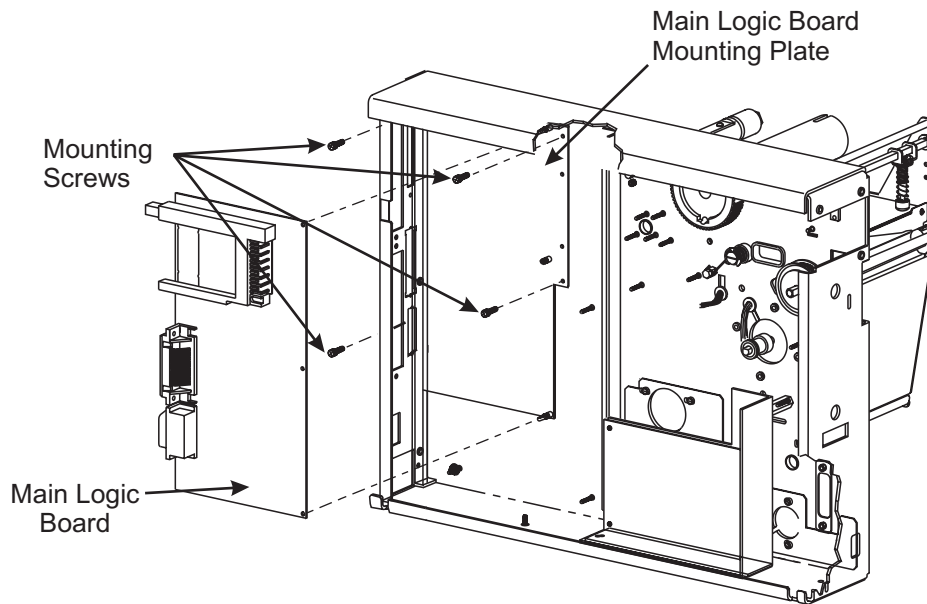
Mounting Bracket Removal (XIII and R-140)
